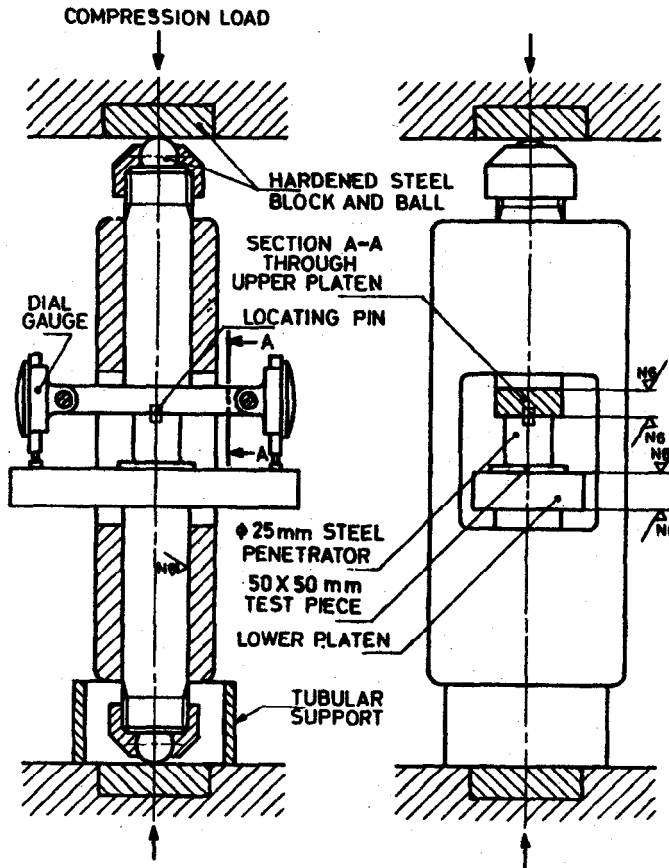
AXIAL LOADING SHACKLE FOR COMPRESSION TEST
